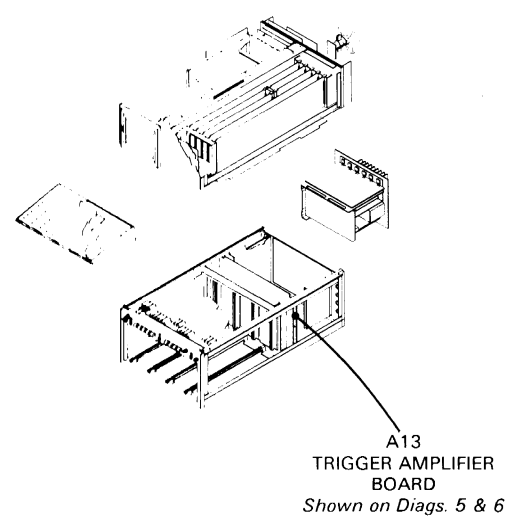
A13—Trigger Amplifier circuit board assembly.
